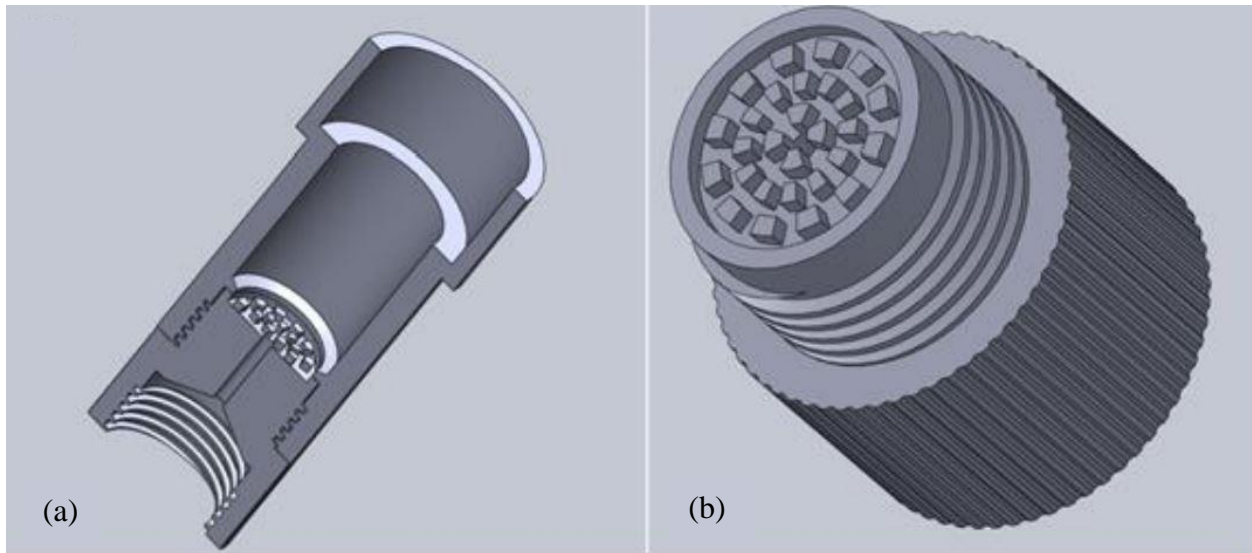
Centrifuge insert design in cross section. Filter paper is placed on base of insert in (b). Body of insert in (a) is screwed onto base of insert. Figure adapted from ref [75].
